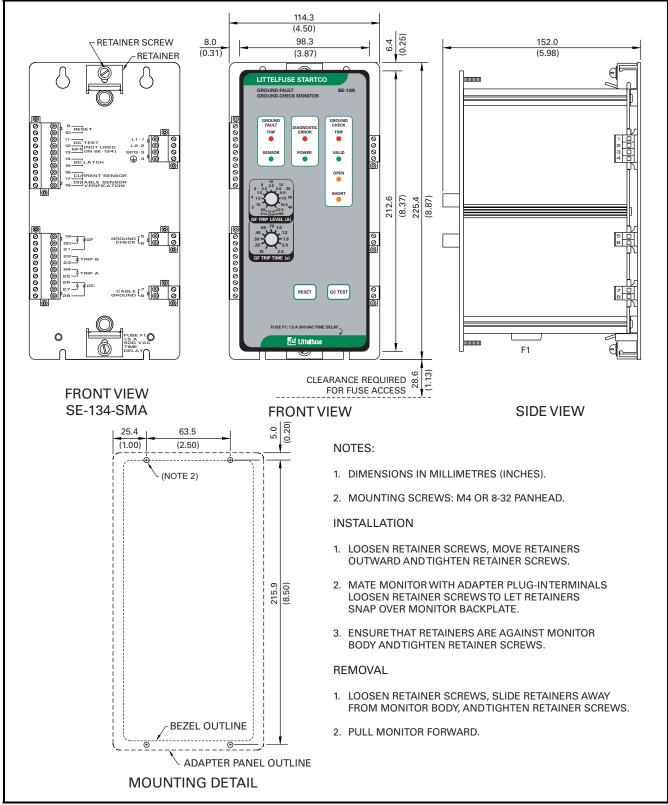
SE-134-SMA Surface Mount Adapter and SE-135 Surface-Mounting Details.
